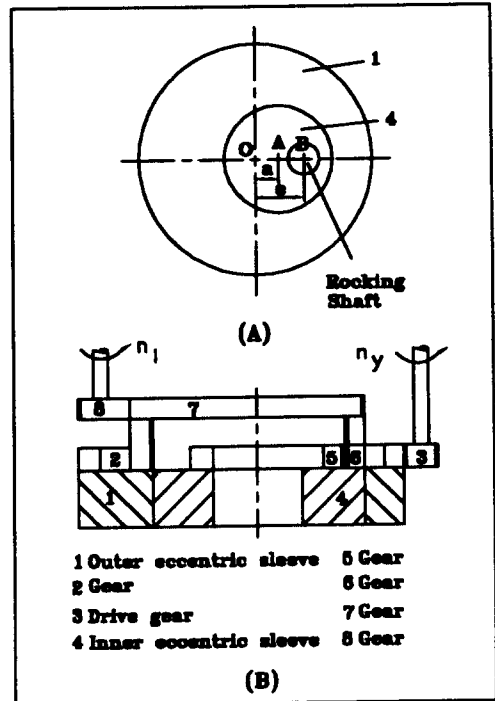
Schematic drawing of double eccentric sleeve in rotary forging process
